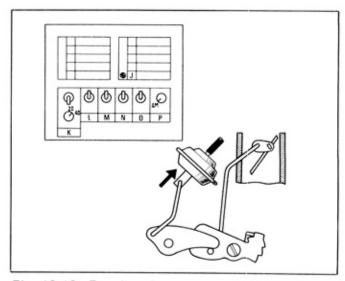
Fast Idle Breaker Inspection (4M)
